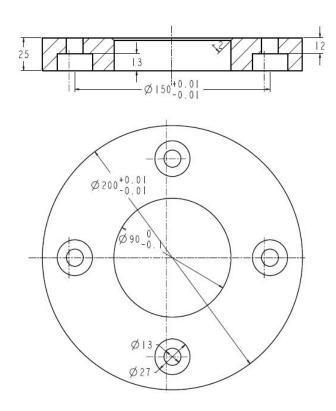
Technical Drawing of the Upper Die Support of Blanking Die Set
